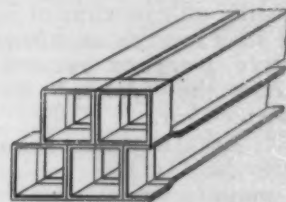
RADIATOR FORMED OF EXPANDED TUBES.
